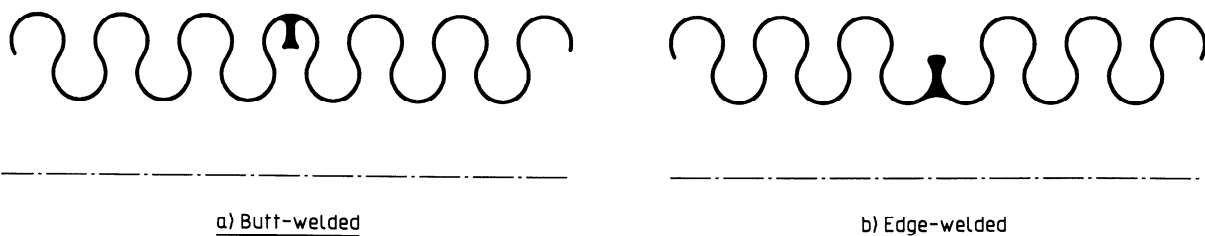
Details of butt-welded and edge-welded hose joints
